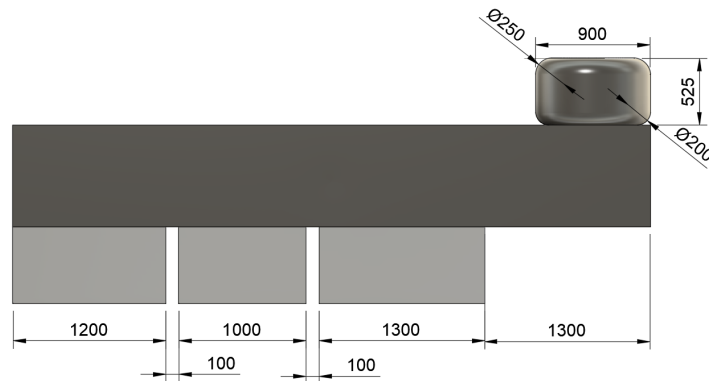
Dimensions in millimetres of the side view of the water tank and retardant tanks.
